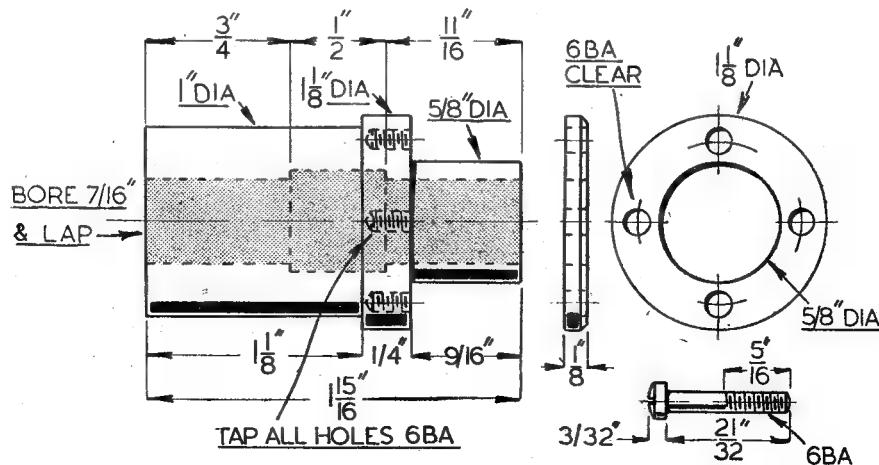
Bushing to carry the gear pinion and the large V-pulley
